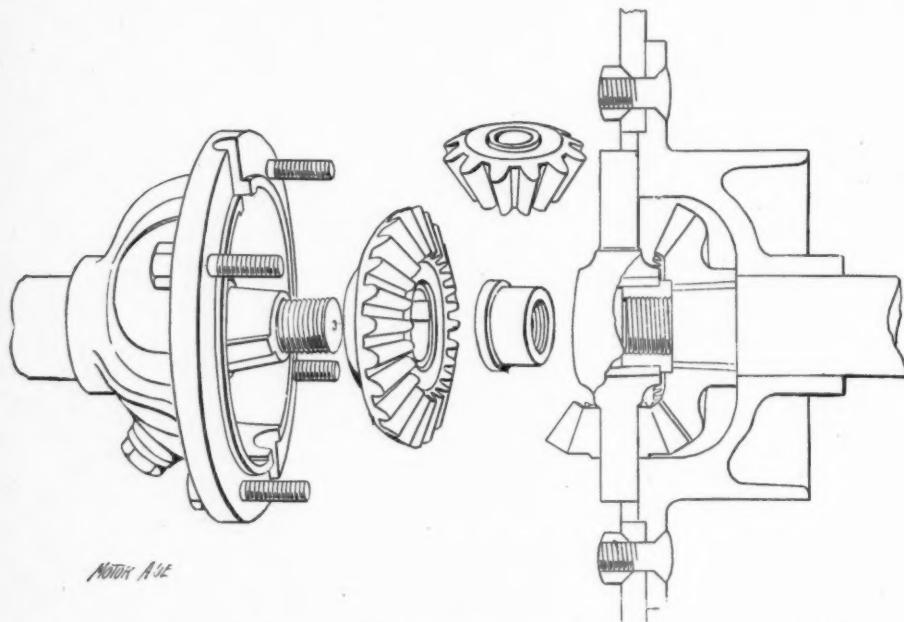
VIEW OF THE COMMON FORM OF DIFFERENTIAL GEAR, DISASSEMBLED.
